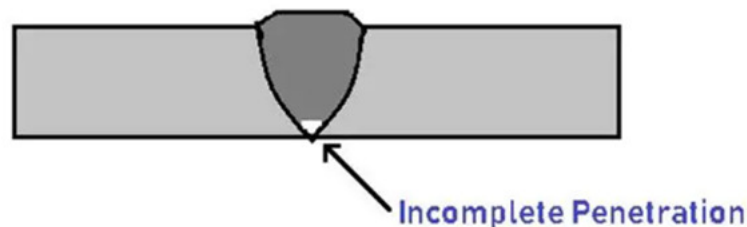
Representing the Incomplete Penetration in weld [The Engineers Post].
